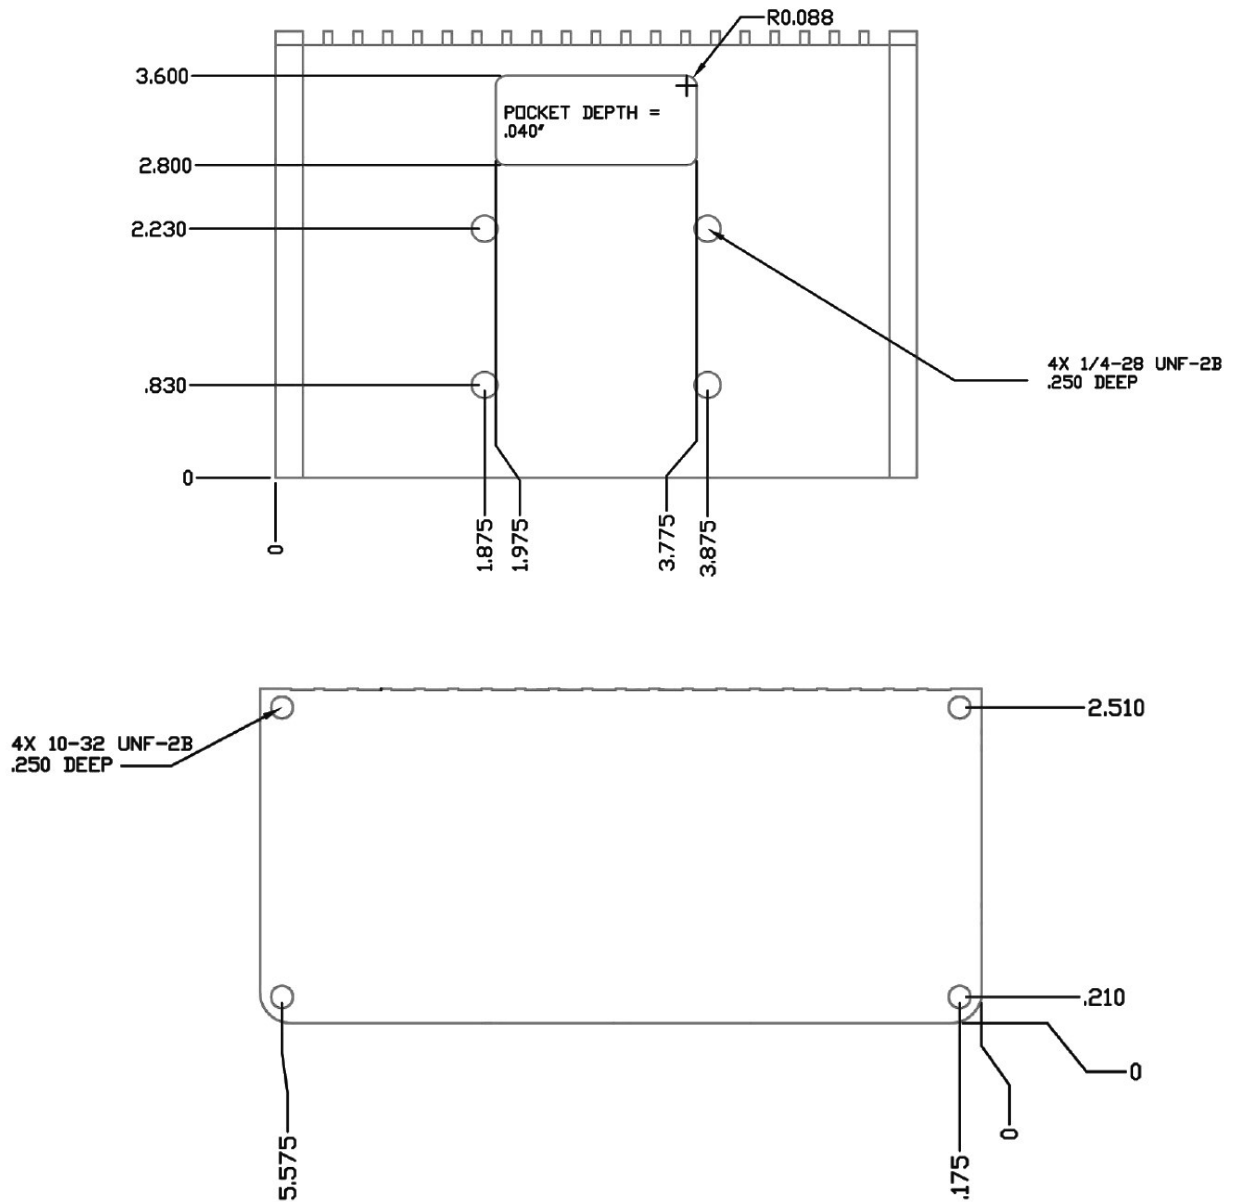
SC3500/SC3800 Phase III Enclosure Mounting Pattern for Back of Enclosure (top) and Bottom of Enclosure (bottom)
